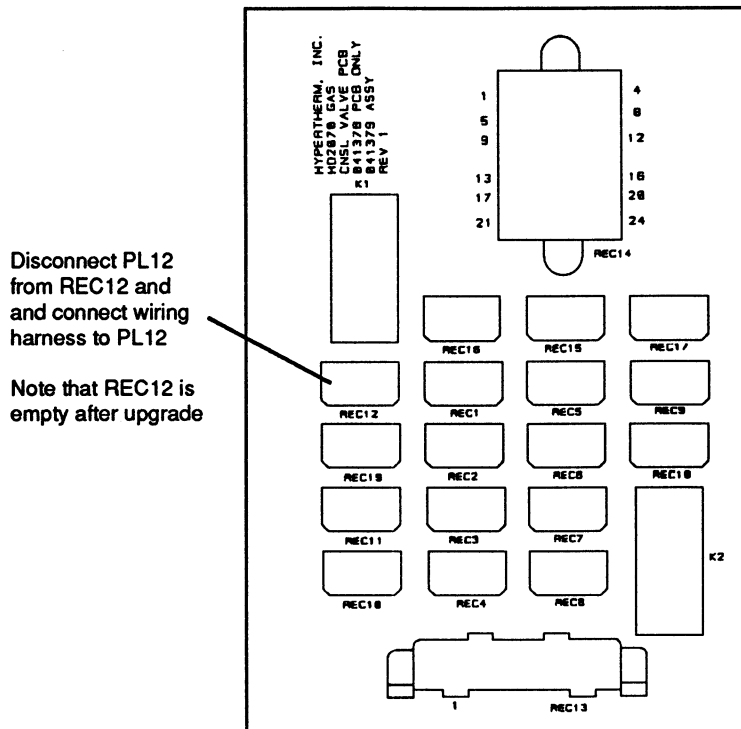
Wire Harness Connection to PL12 at Gas Valve PCB A8
